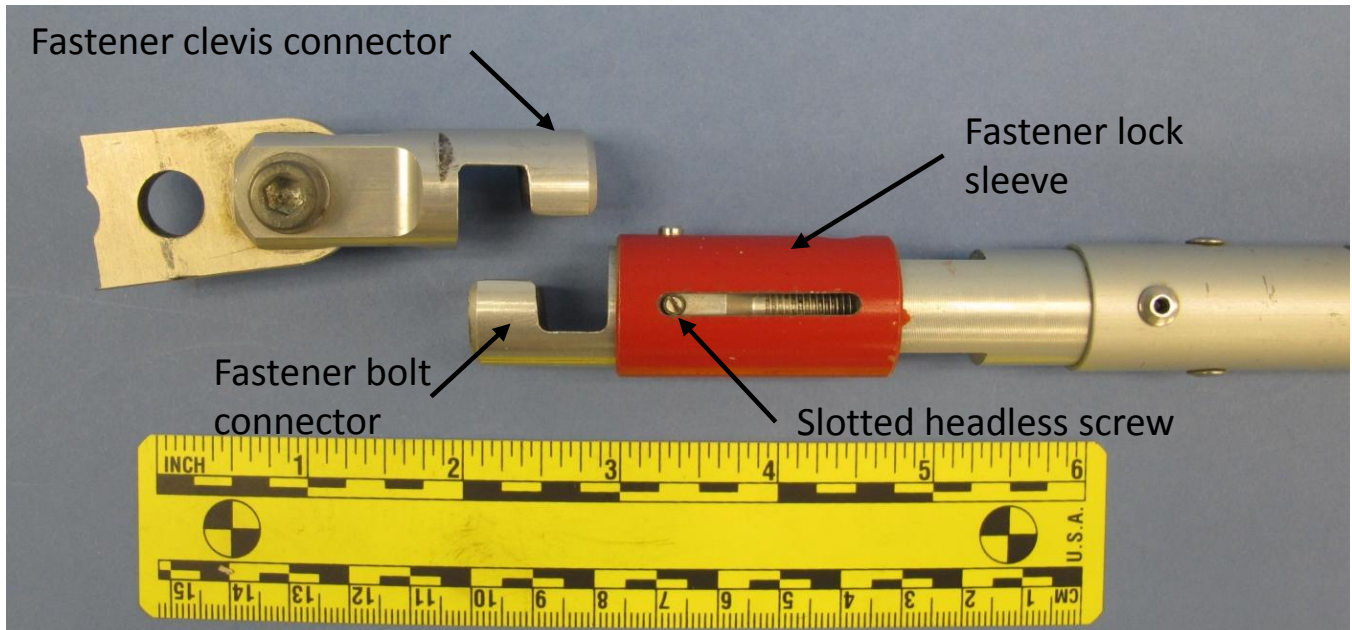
Closer view of pieces of the elevator control tube and quick fastener assembly. The key components of the quick fastener assembly are identified.
